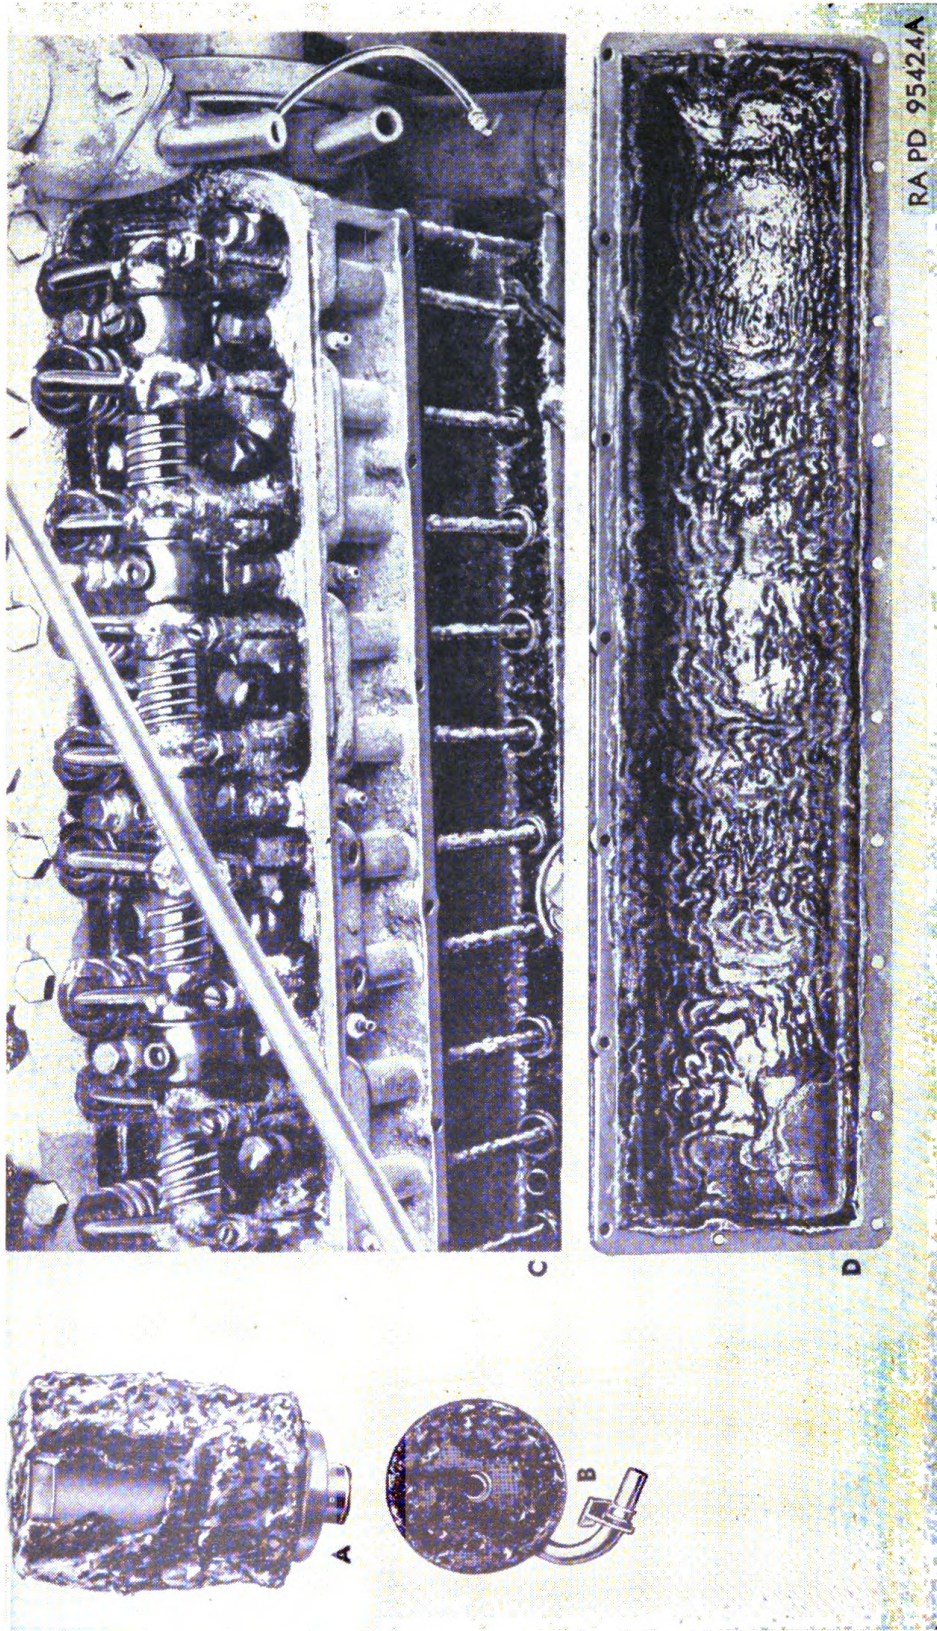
Sludge accumulation on (A) oil filter, (B) oil pump strainer, (C) valve mechanism, and (D) valve cover plate.
